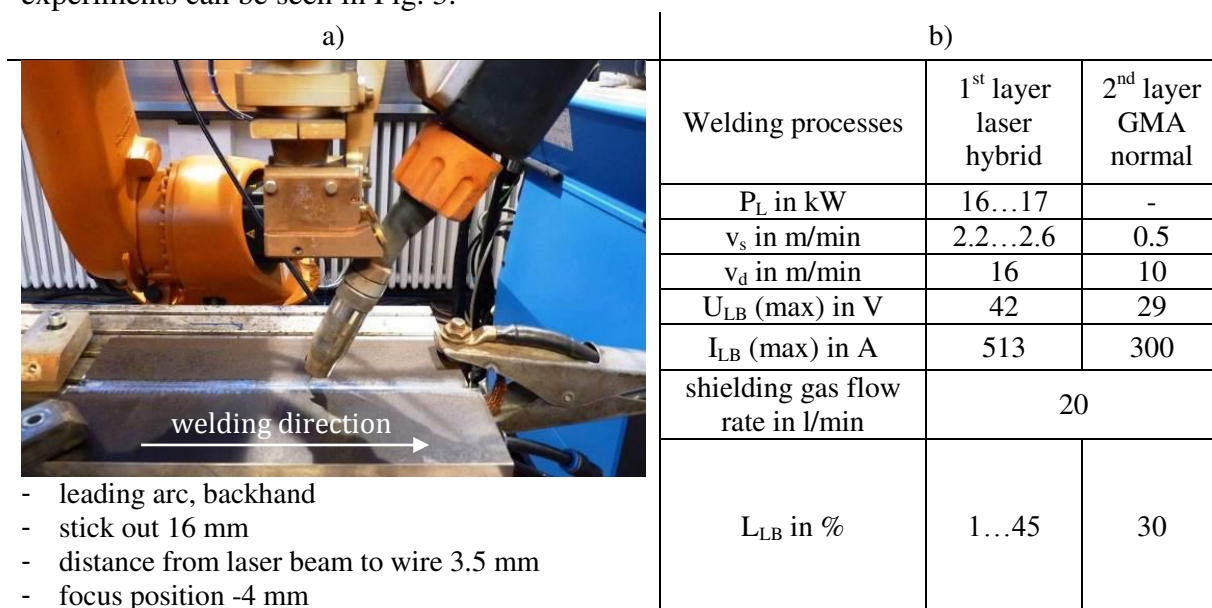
Experimental setup (a) and welding parameters (b)
